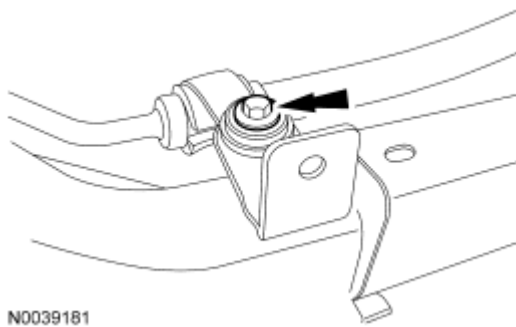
Locating Power Steering Pressure Line Bracket Bolt
